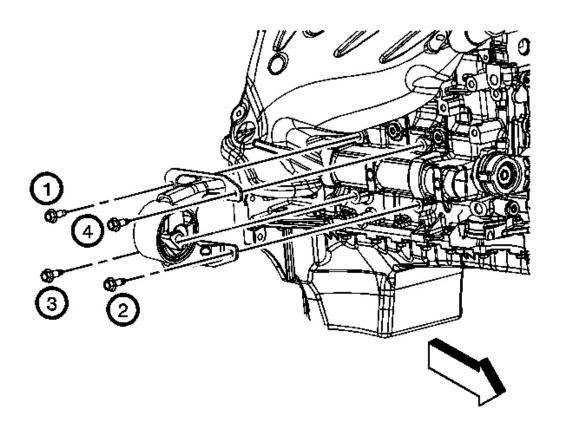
Identifying Engine Mount Courtesy of GENERAL MOTORS CORP.
